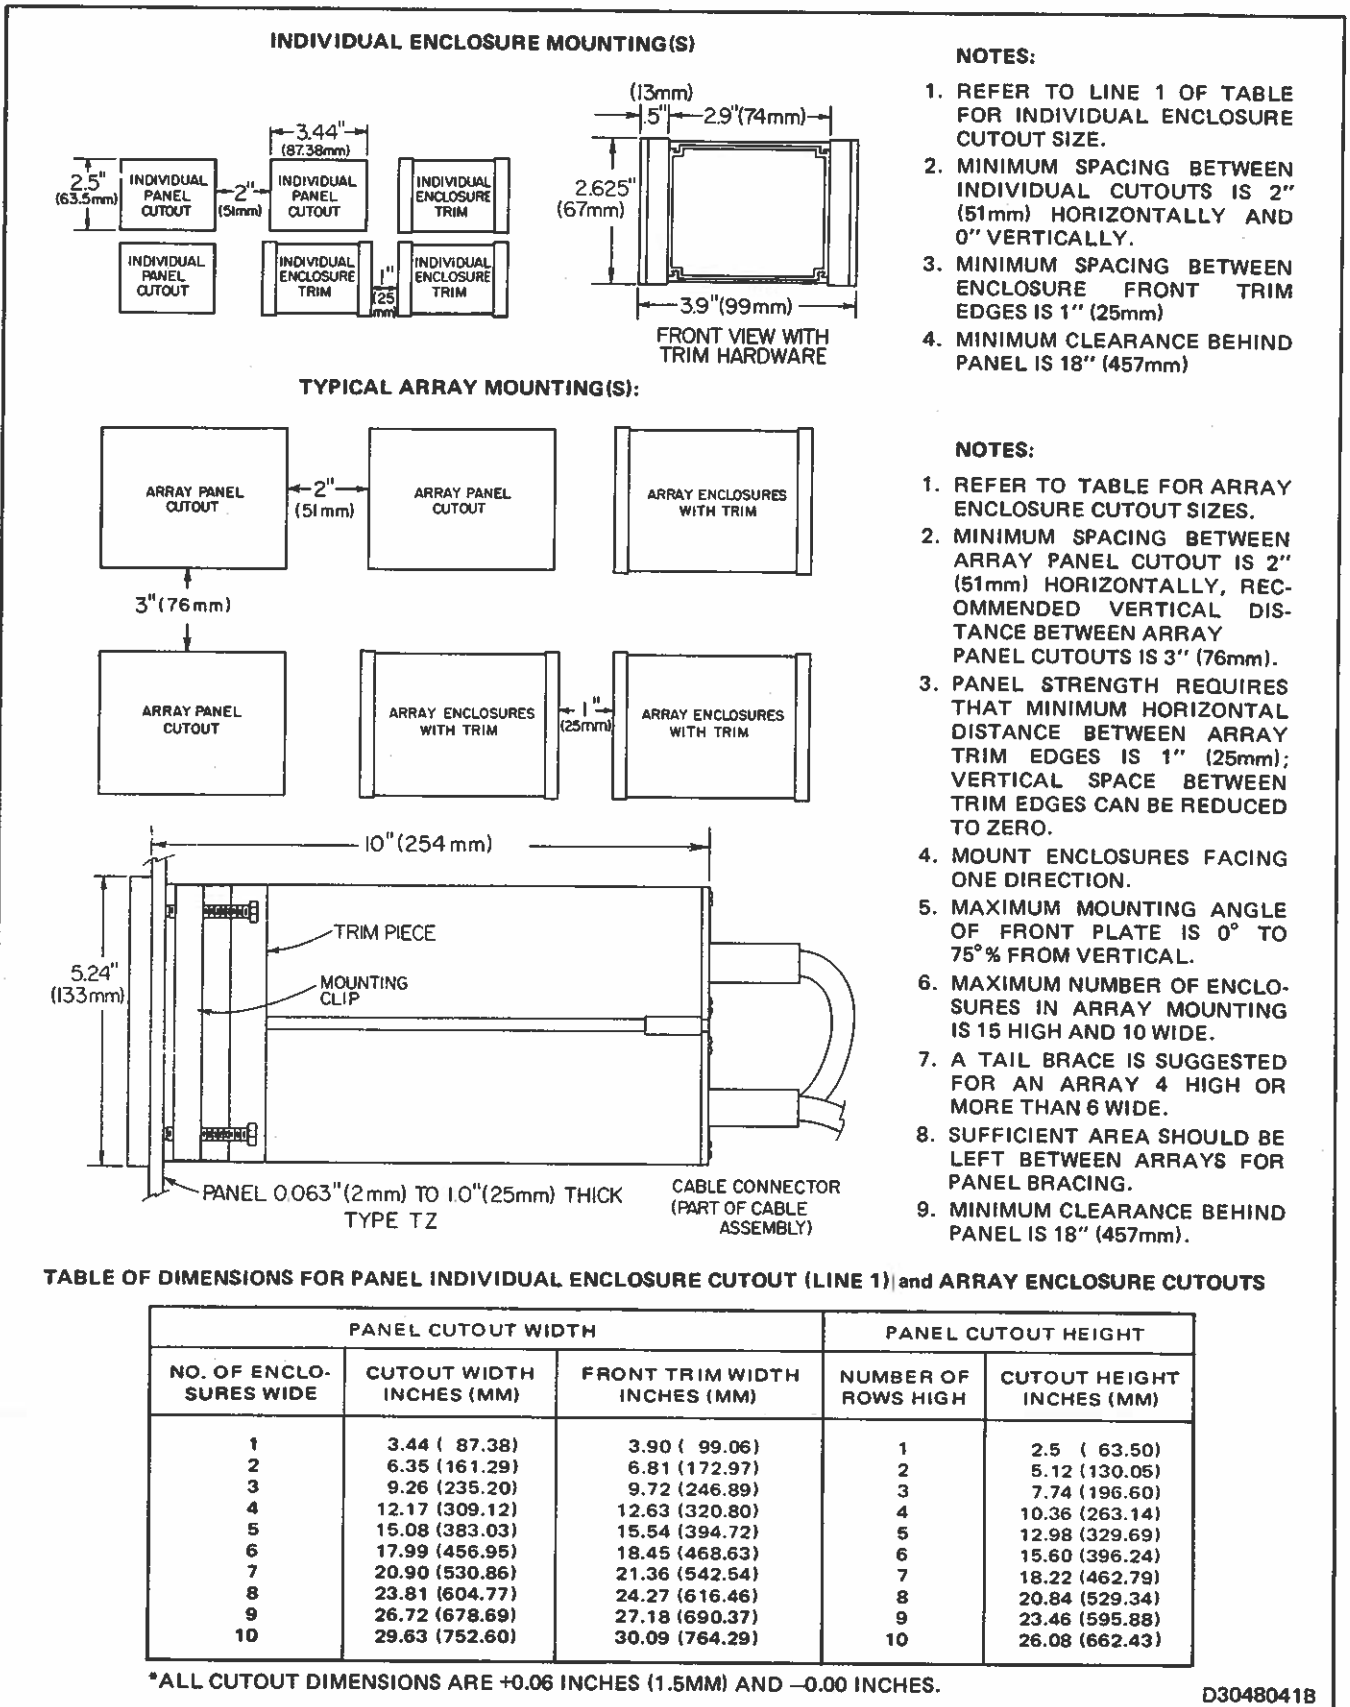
Type T Station Front Plate Controls and Typical Assembly Dimensions
